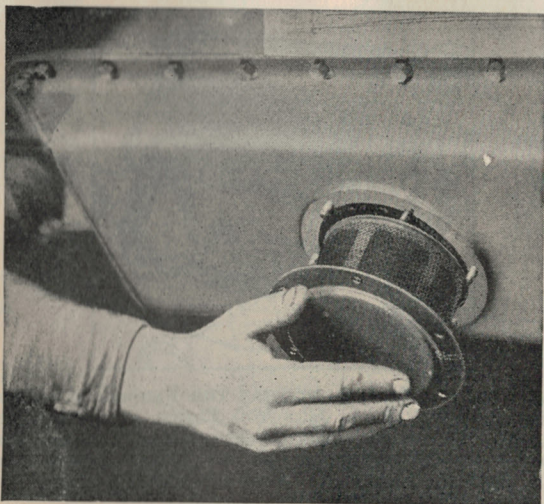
REMOVING THE OIL FILTER FOR CLEANING
